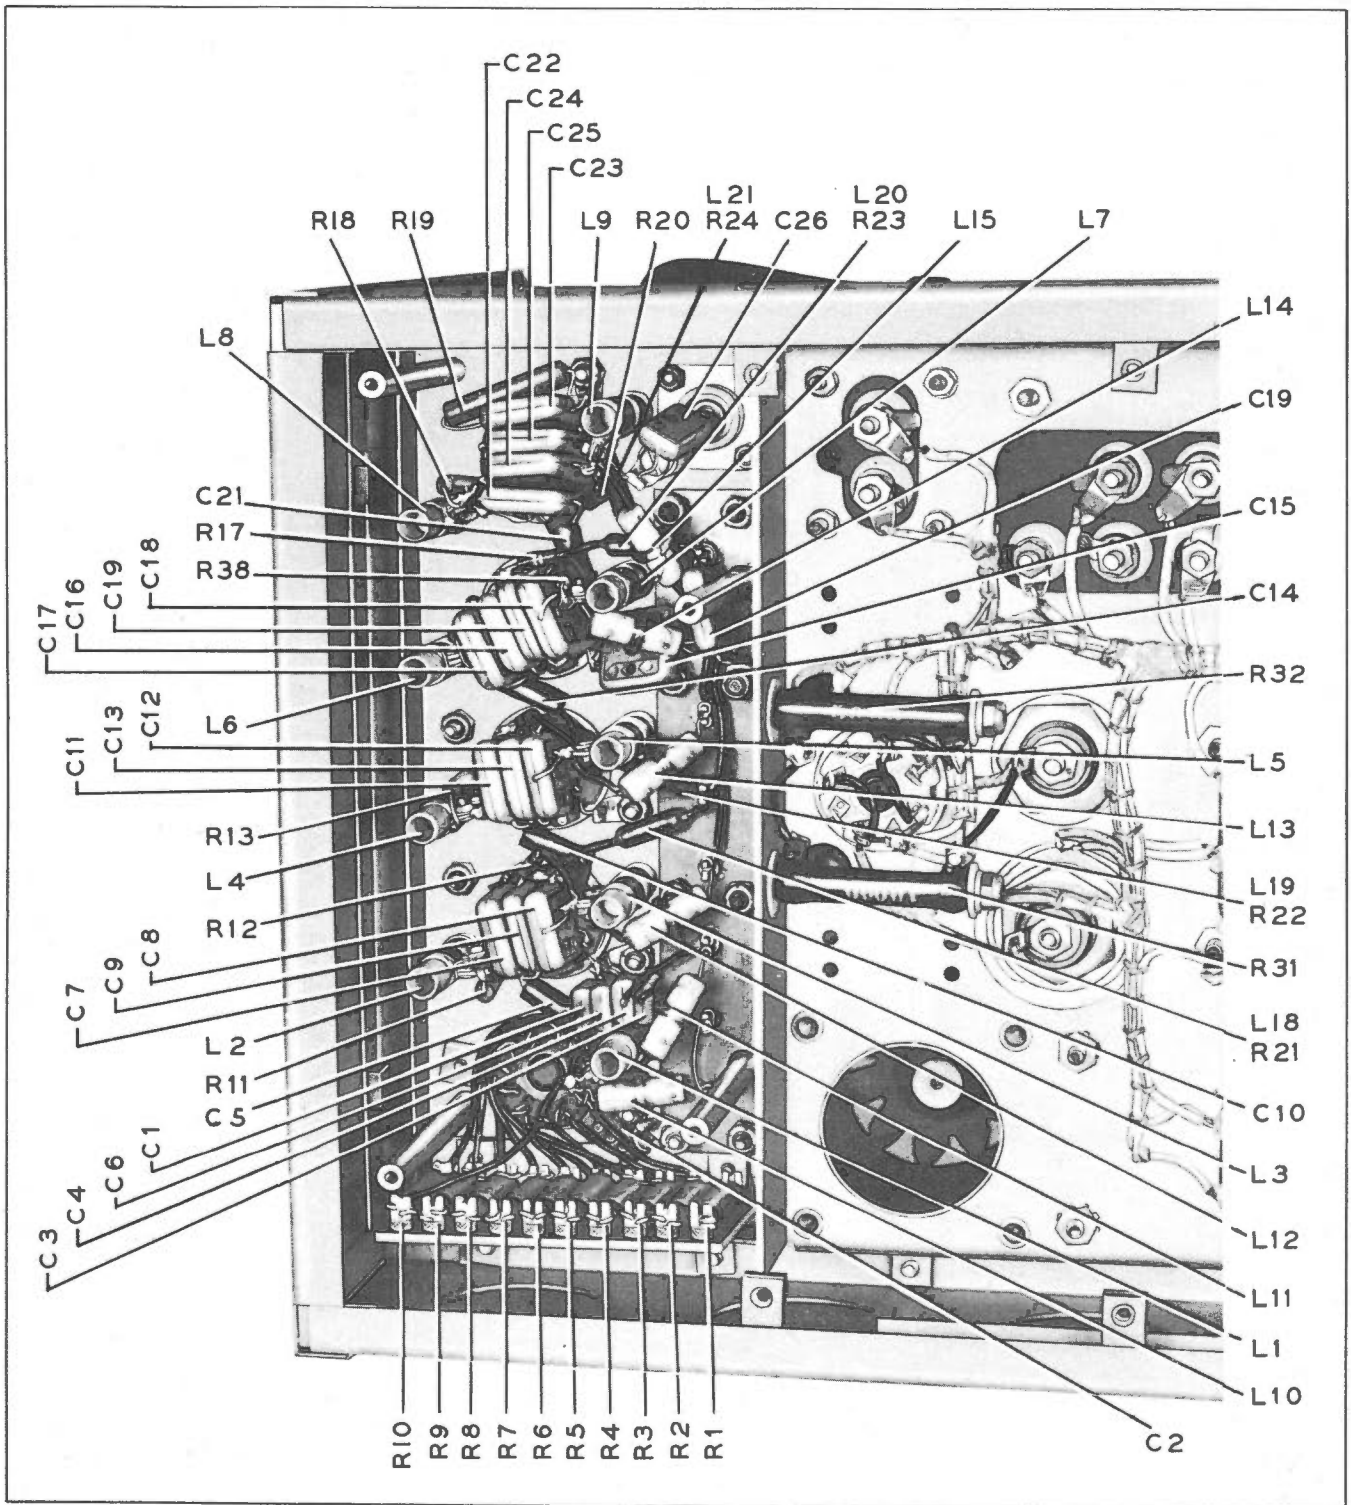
Radar Transmitter T-28/APT-1—Bottom View of Hash Generator and Amplifier Section
